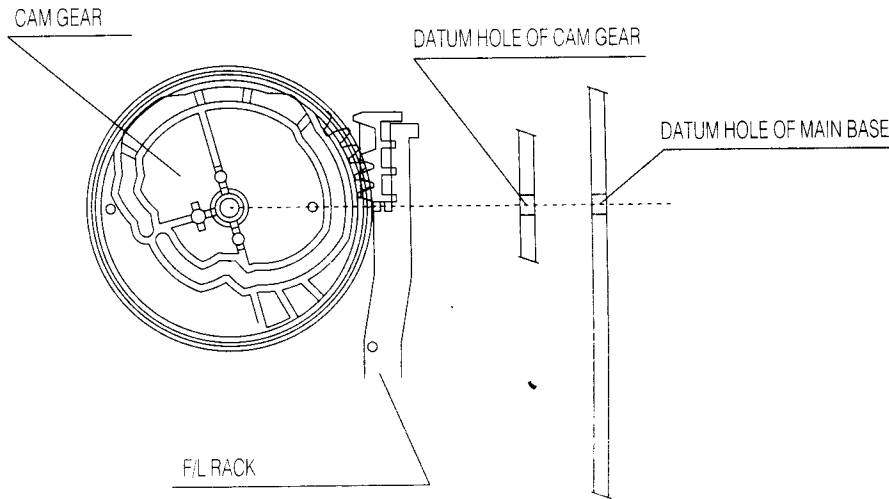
DATUM POSITION OF F/L RACK & CAM GEAR
